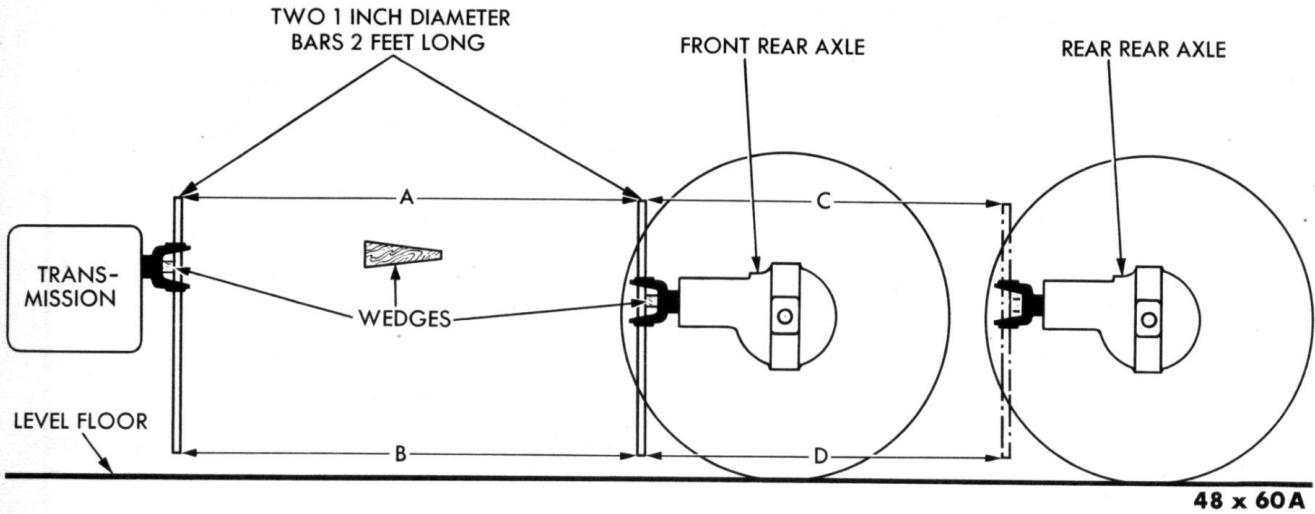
Method of Checking Parallel Alignment of Universal Joint Yokes
